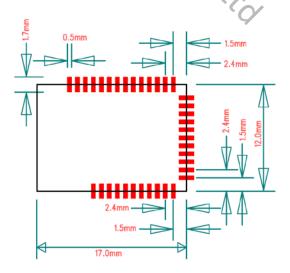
FSC-BT2024NI footprint Layout Guide (Top View)
